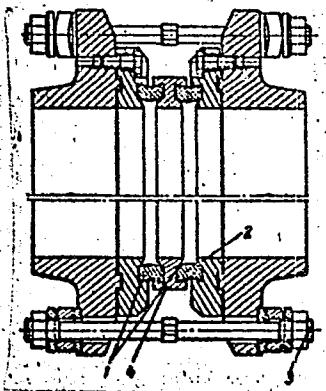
1 - elastic rubber elements; 2 - flange; 3 - coupling; 4 - floating ring.
